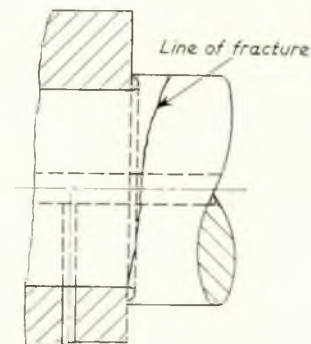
Detail of No. 3 crankpin/forward web shrunk connexion showing course of fatigue fracture (Case V)
